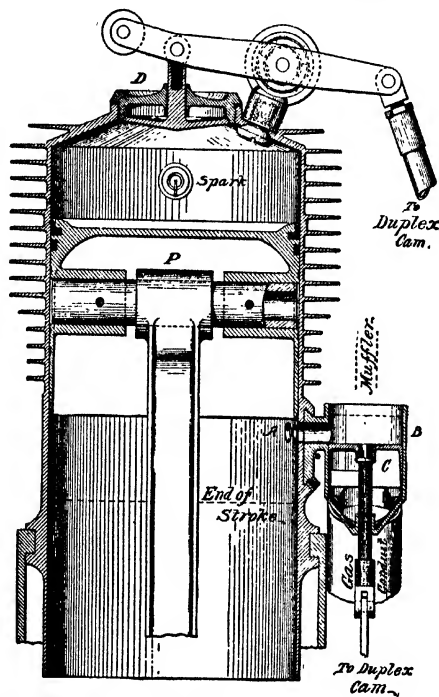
Sectional diagram of cylinder and valves of the "Gyro" engine.
